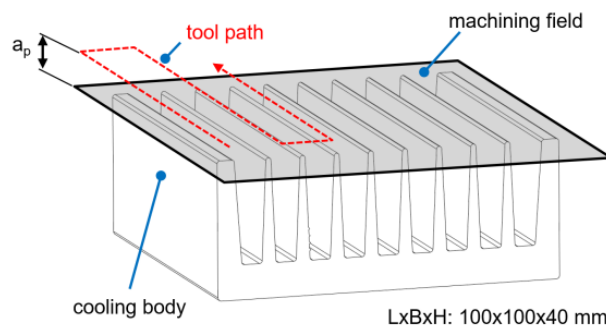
Sample manufacturing process showing the machining area and the path of the tool (red)
